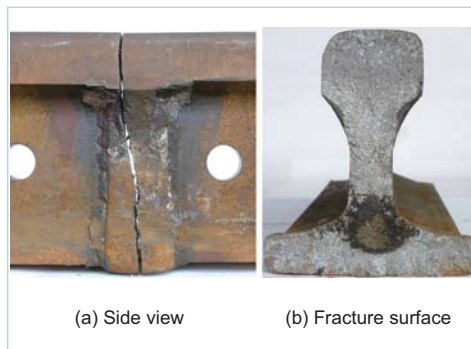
Example of the appearance and the fracture surface at a broken aluminothermic weld
